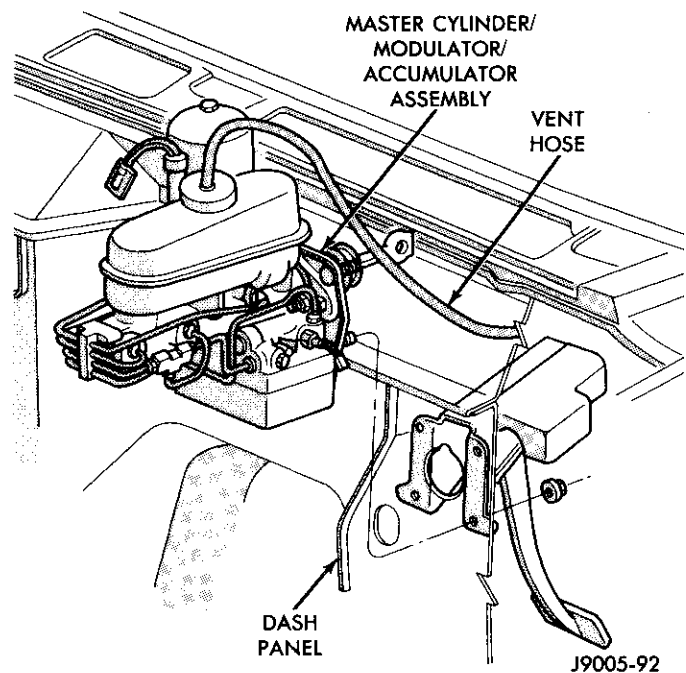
Removing/Installing Master Cylinder, Modulator And Accumulator Assembly
